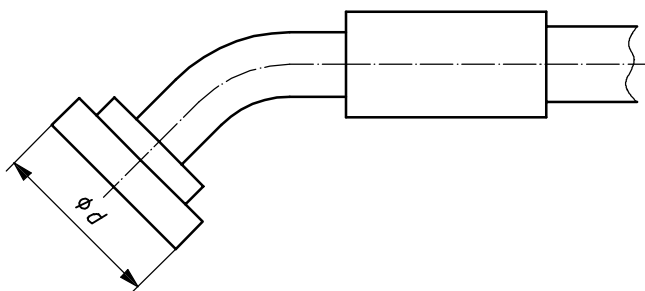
Forms R45 and S45 — 45° elbow hose fitting with flange head with O-ring groove in accordance with ISO 12151-3
